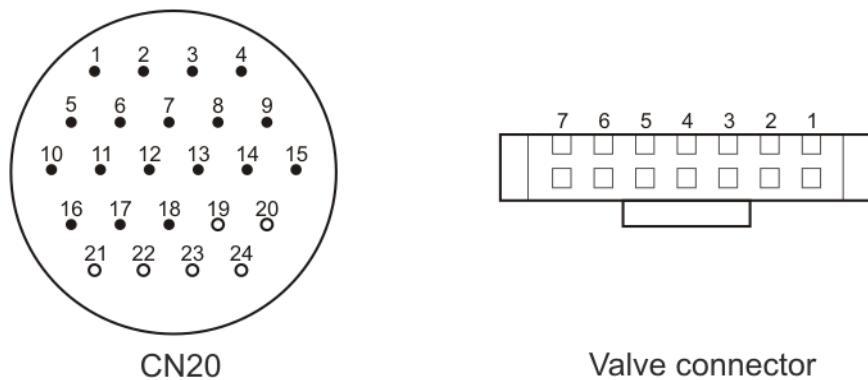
Wrist I/O cable connectors: CN20 - valve connector
